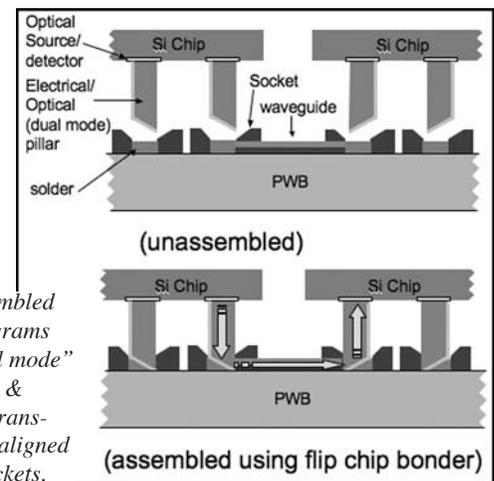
Unassembled & assembled diagrams for slant tip "dual mode" pillars for optical & electrical signal transmission held and aligned by board level sockets.
